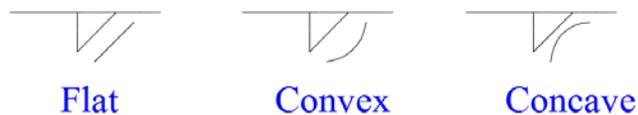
Flat, convex, and concave symbols (used on a fillet weld symbol)
